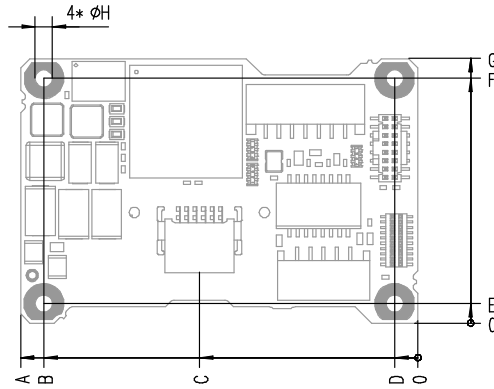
ETK-S4.2B Dimensions - Top View
